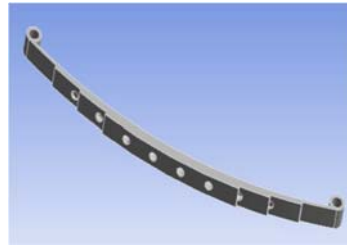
Topology optimization in graduated leaves of assembly having uniform holes and uniform slot.
